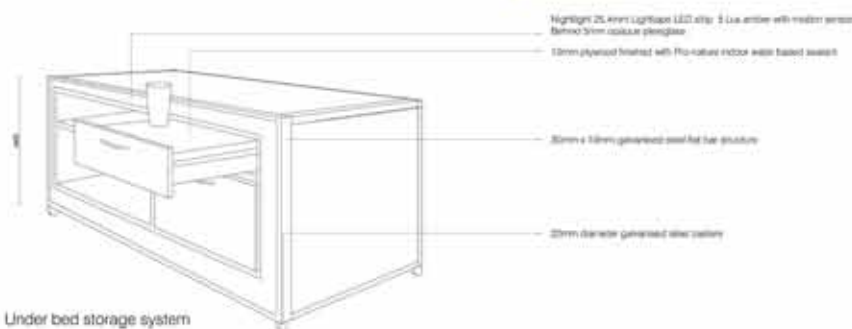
Bedroom details, not to scale (Author, 2013)
